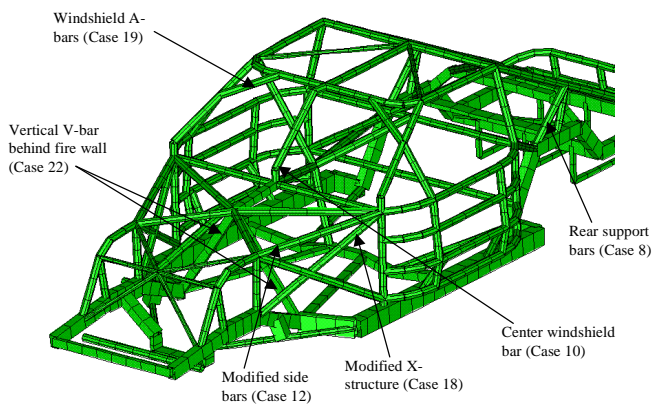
Isometric View of Case 23 Design (Sheet Metal Removed for Clarity)
